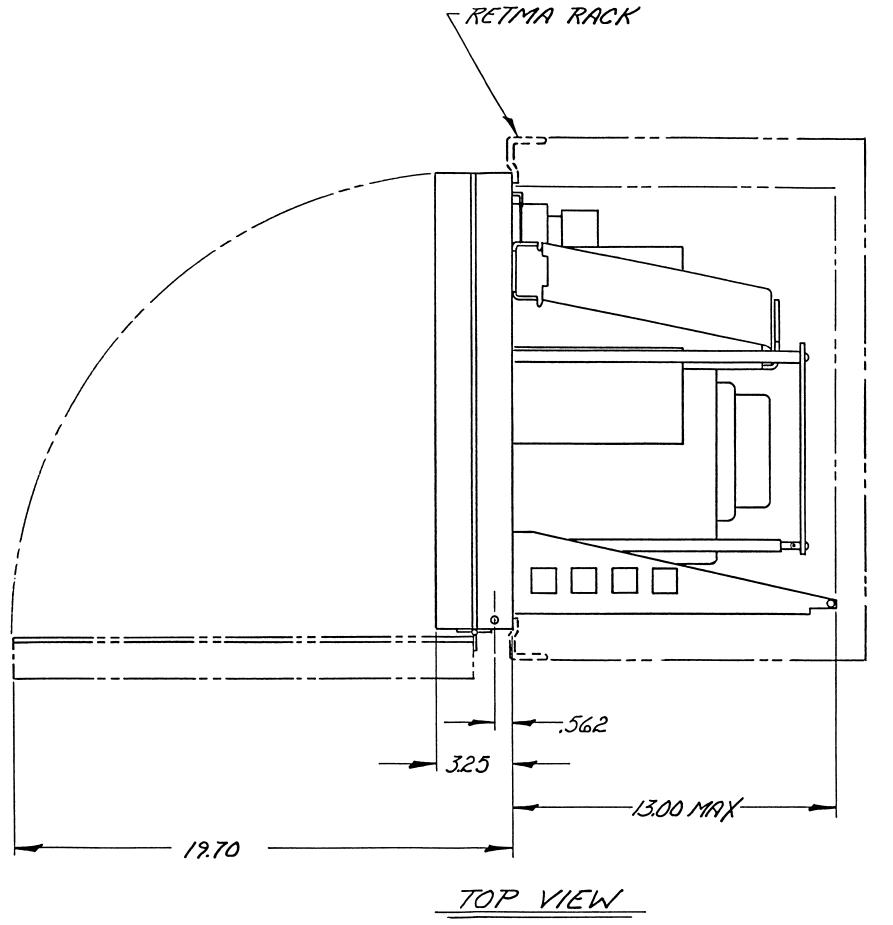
Model 900X Outline Dimensions (Sheet 2)
